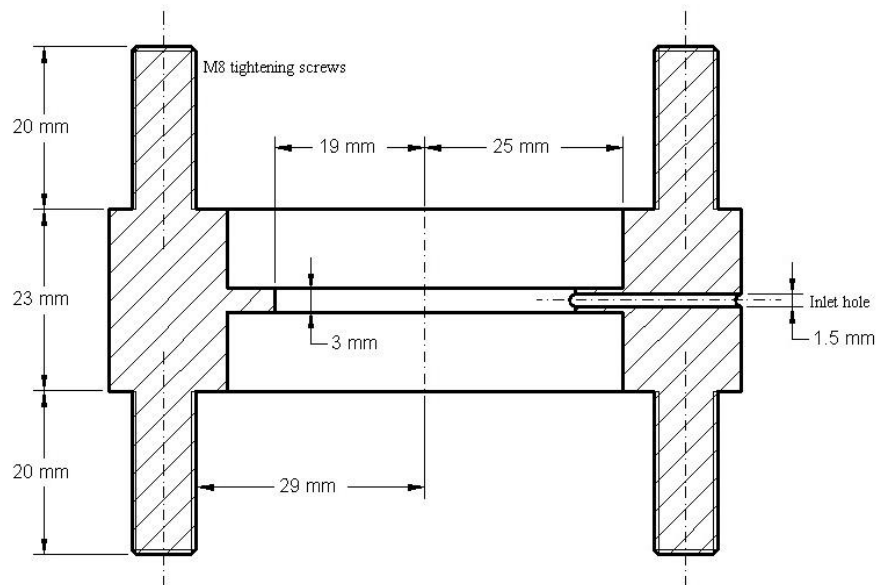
Exploded view of the stainless steel PEF test cell.
